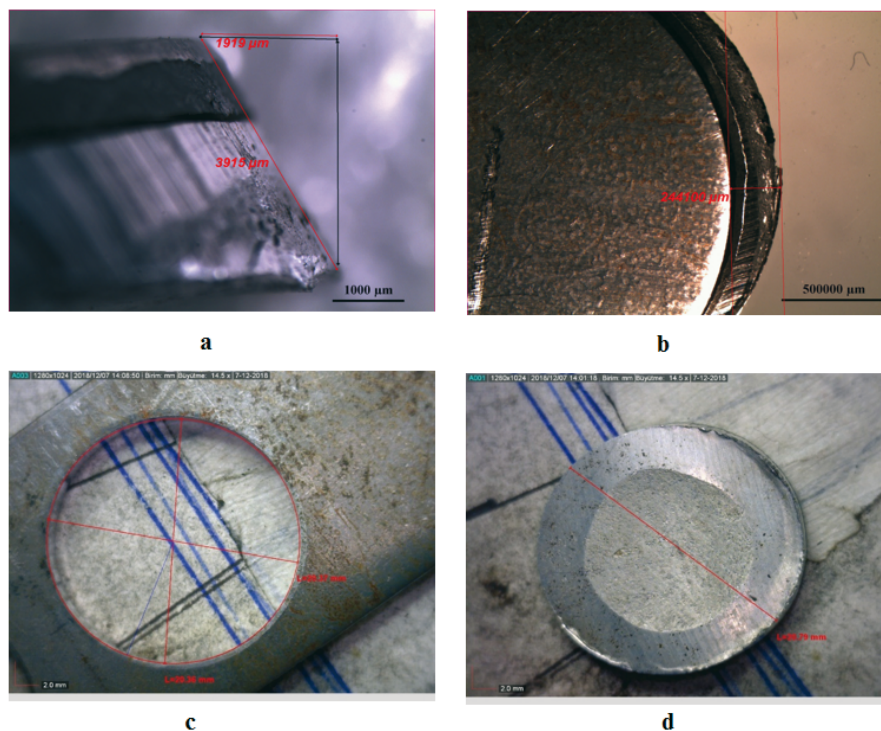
Deformations on part and blank after blanking process using punch 16
